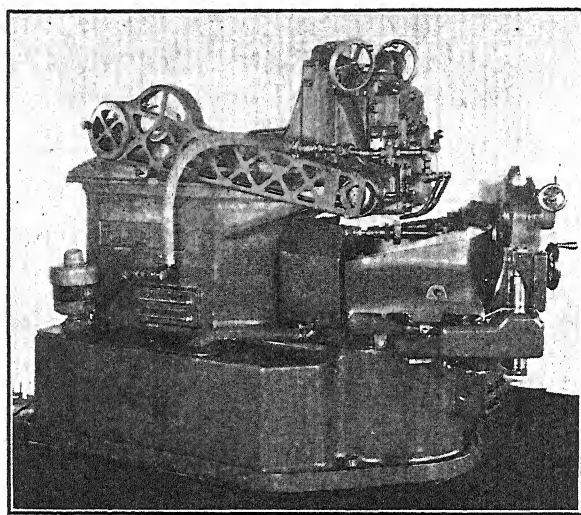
The Pratt and Whitney 10-In. Hydraulic Gear Grinder for Generating Spur and Helical Gear Teeth.
